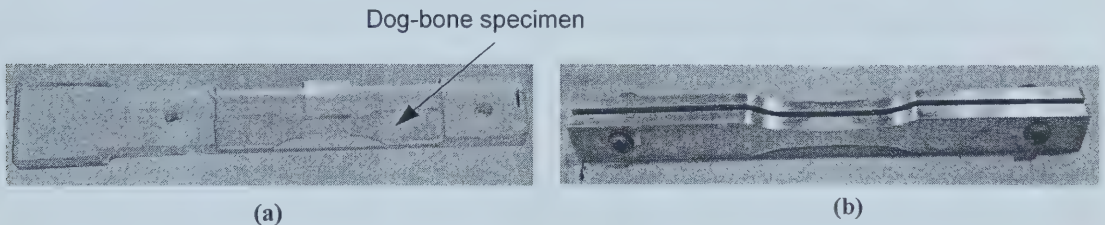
(a) Milling jig with specimen, and (b) Polishing jig for width reduction in the gauge section.
